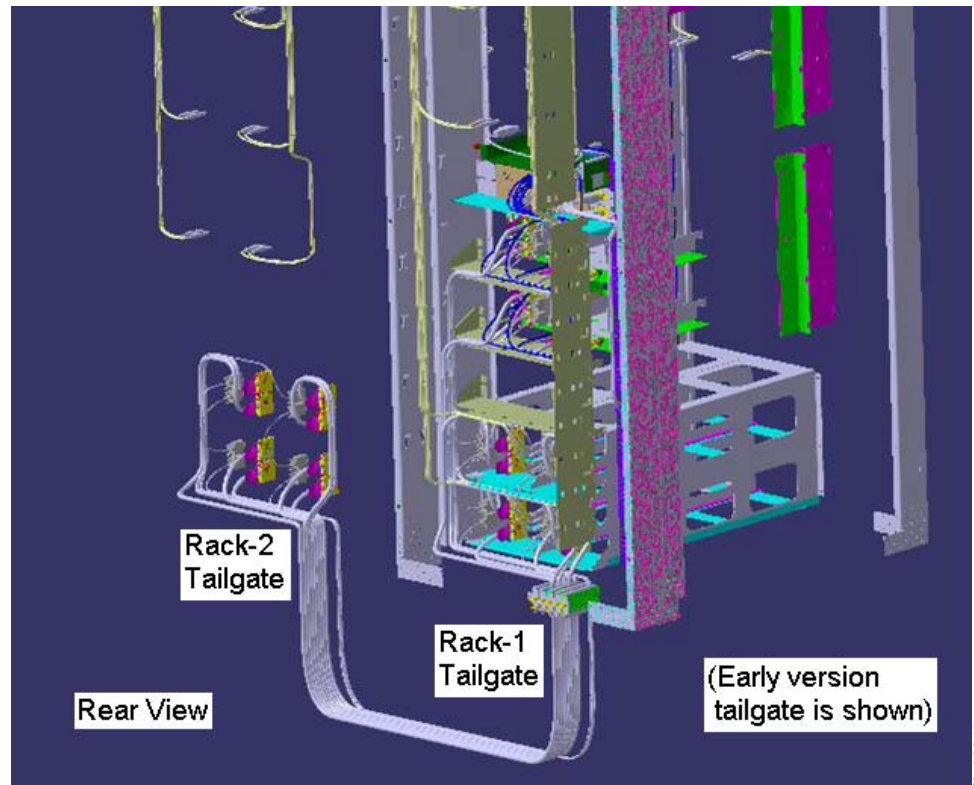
Mechanical routing of the RIO and SPCN cables (rack-to-rack)
